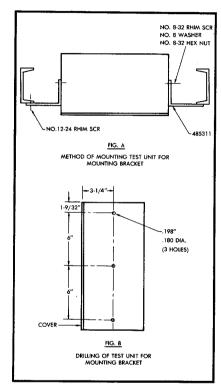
Wire Chief's Test Set, Type B, Mounting Details
